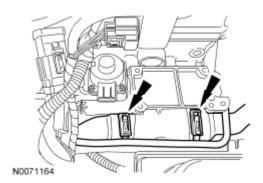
Locating Upper Radiator Hose And Heater Hose Courtesy of FORD MOTOR CO.
